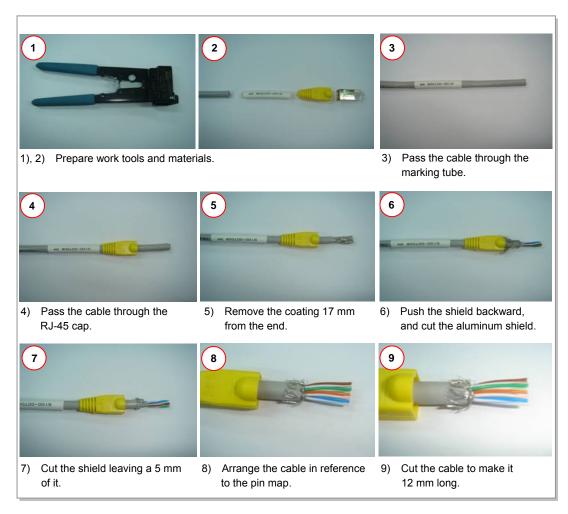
Assembling the RJ-45 Connector (Shield Type) (1)
